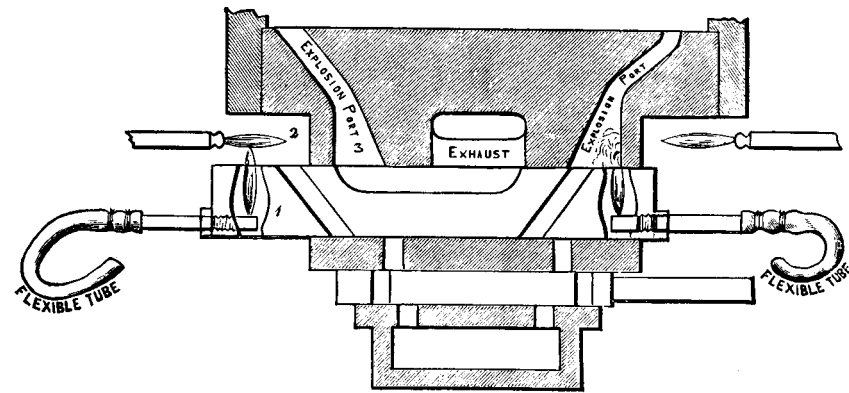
Slide-valve flame igniter, Hugon engine. (Clerk, *The Gas and Oil Engine*, 1896)
